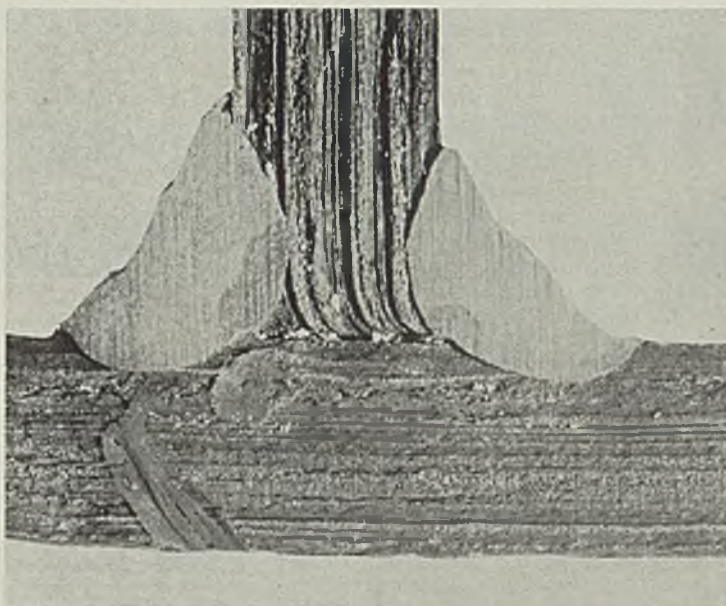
Excellent fillet welds like this are made readily in wrought iron
